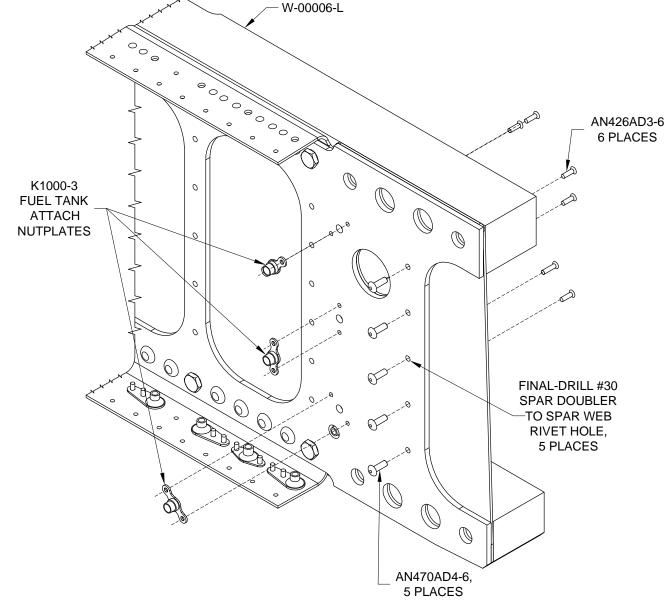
FUEL TANK NUTPLATE AND SPAR DOUBLER RIVET INSTALLATION
